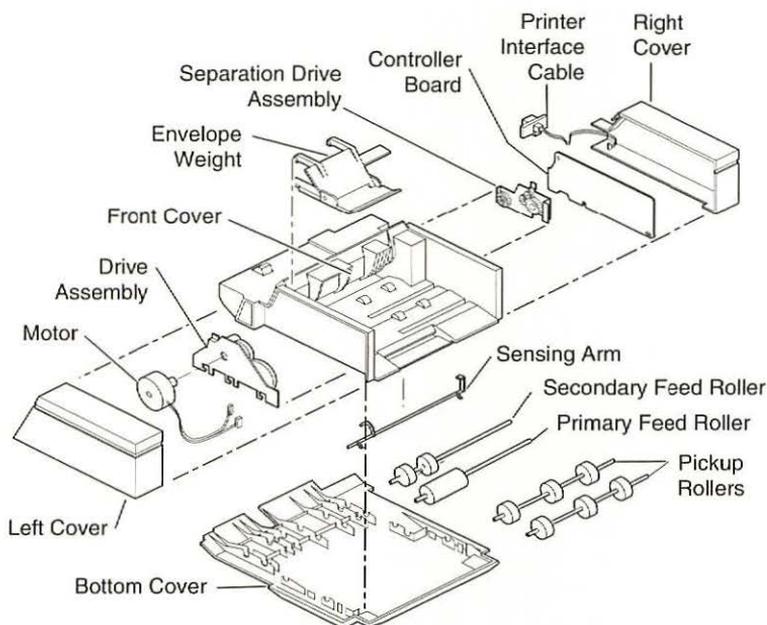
LaserWriter 16/600 PS Envelope Feeder Exploded View
